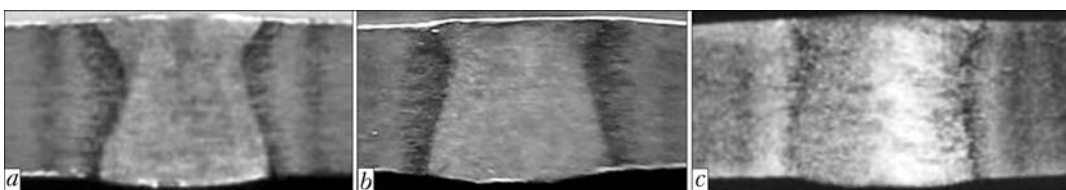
Transverse macrosections of a weld made on Nimonic-75 alloy by A-TIG welding (for *a*–*c* see the text)
